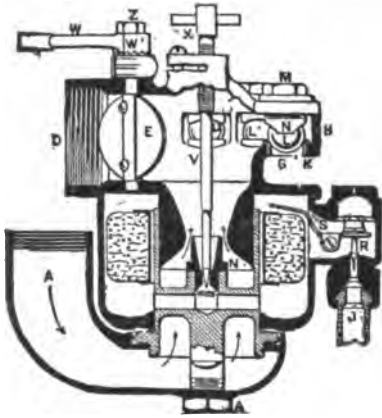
The Kingston Carburetor. Instead of using a Spring on the Auxiliary Air Intake; balls (L) Govern the Intake of Air through auxiliary air intake (G). (W) is the throttle (E) Butterfly valve. (D) Connects to intake pipe on engine. (A) Main air intake. (V) Gasoline needle valve. The float is concentric type. Venturi mixing tube.
